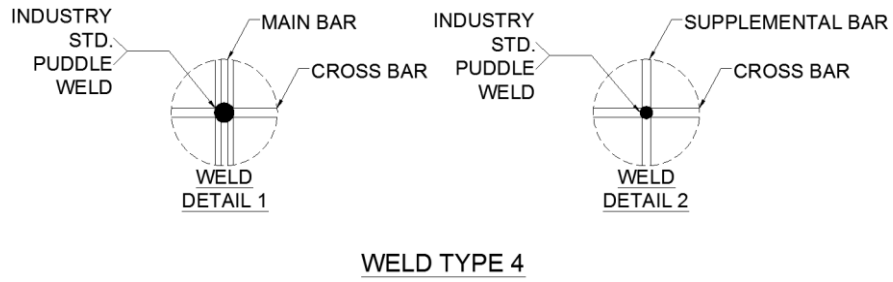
Type 4 weld detail (original detail provided by the BGFMA)
